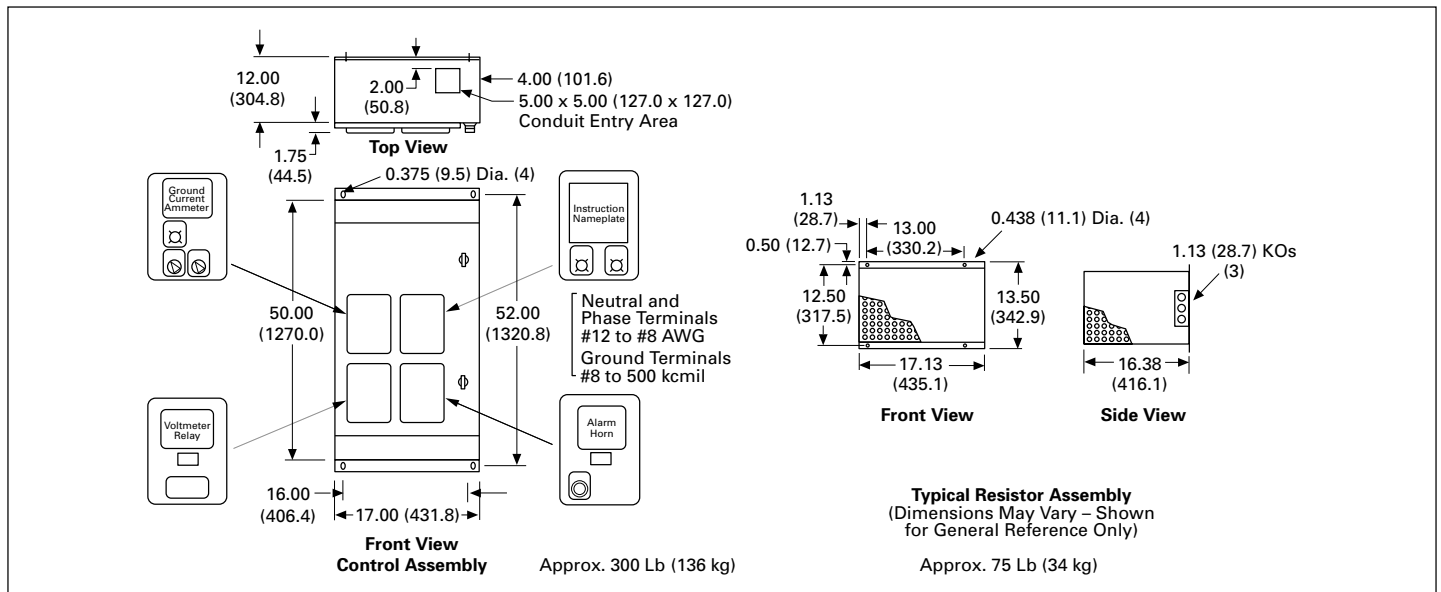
NEMA 1 Wall Mounted—Dimensions in Inches (mm)
